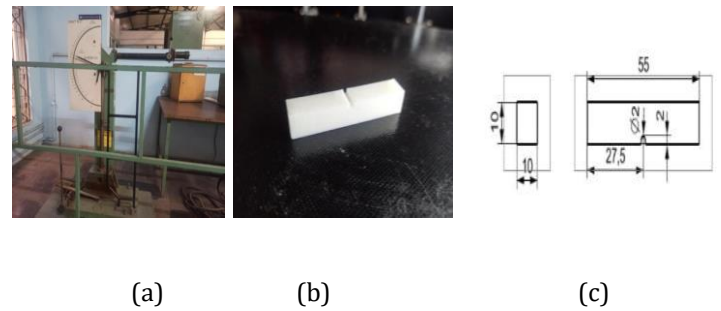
Charpy Test machine (b) Prepared sample (c) Sample dimensions
